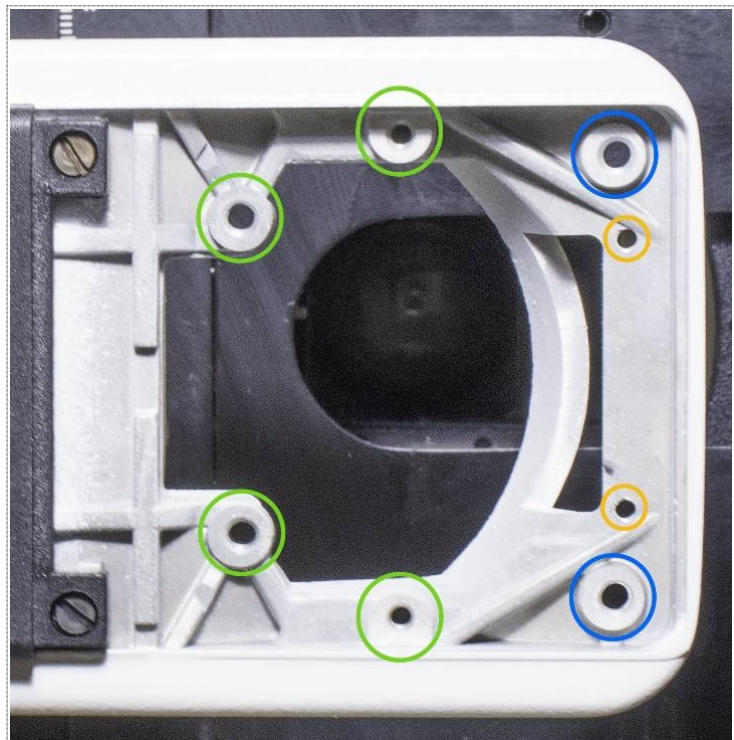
View from the top down on the microscope arm after the nosepiece platform has been removed.
